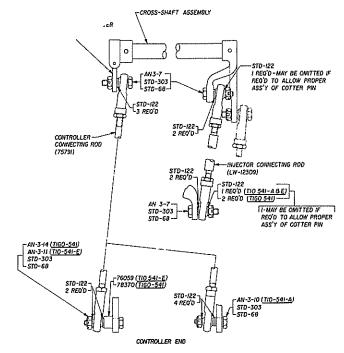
Fuel Injector and Controlled Rods Attaching Parts
